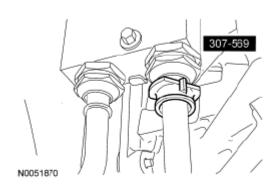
Locating Secondary Latches Courtesy of FORD MOTOR CO.
